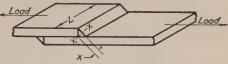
Weld in Cross Shear, and Tension.
